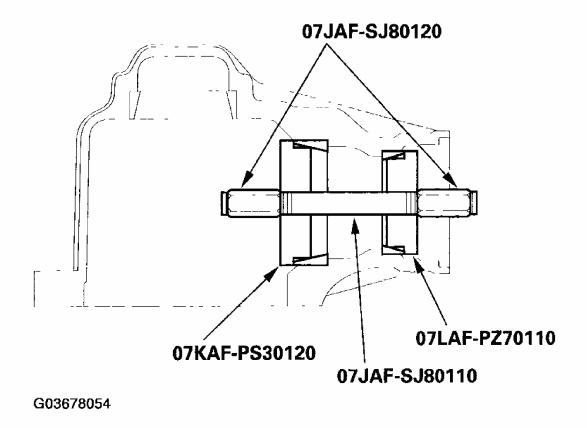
Installing 62mm Tapered Roller Bearing Outer Race And 50mm Tapered Roller Bearing Outer Race Courtesy of AMERICAN HONDA MOTOR CO., INC.
